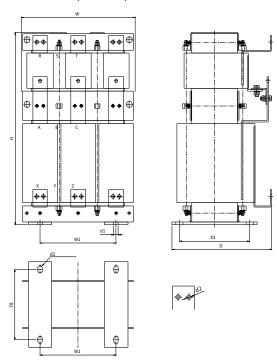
2\*A8+L frame installation dimensions (unit: mm)
